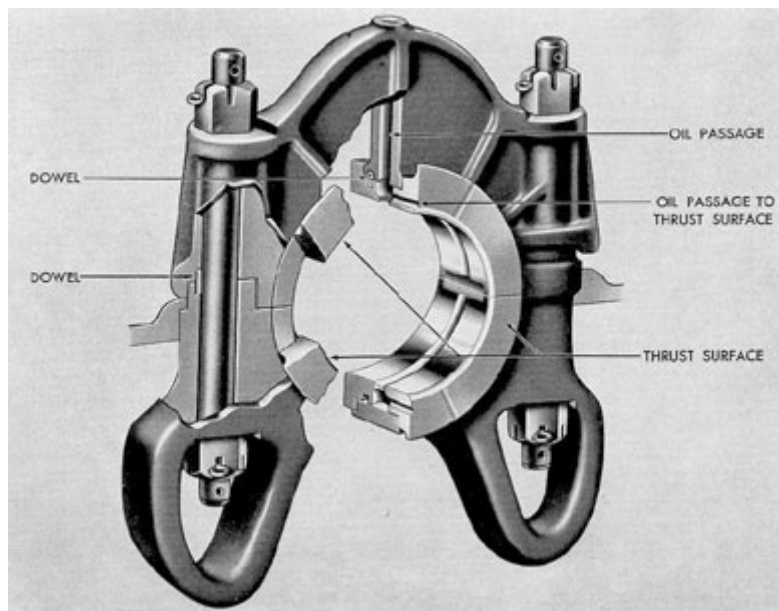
Upper crankshaft thrust bearing, F-M.
